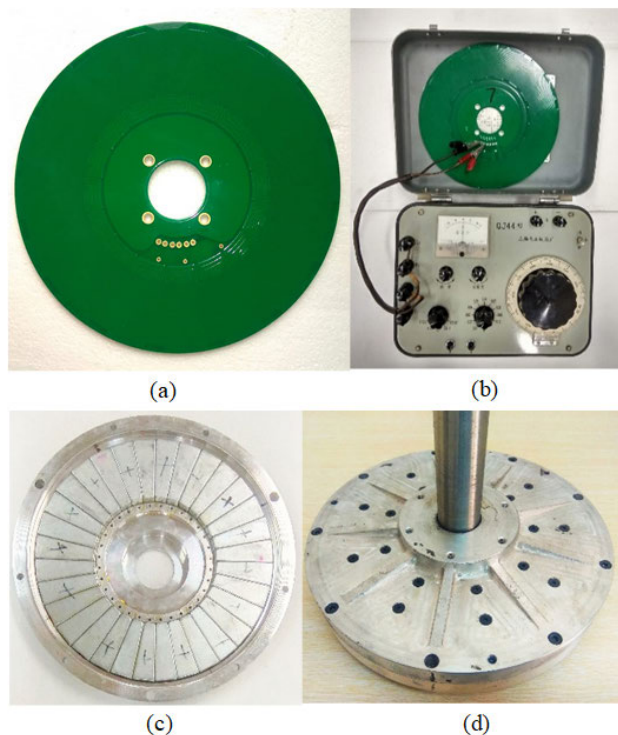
The designed PCB AFPM generator. (a) Actual PCB winding. (b) The resistance test device of DC double-arm Bridge. (c) Rotor disk with surface mounted PM segments. (d) The assembled machine.
